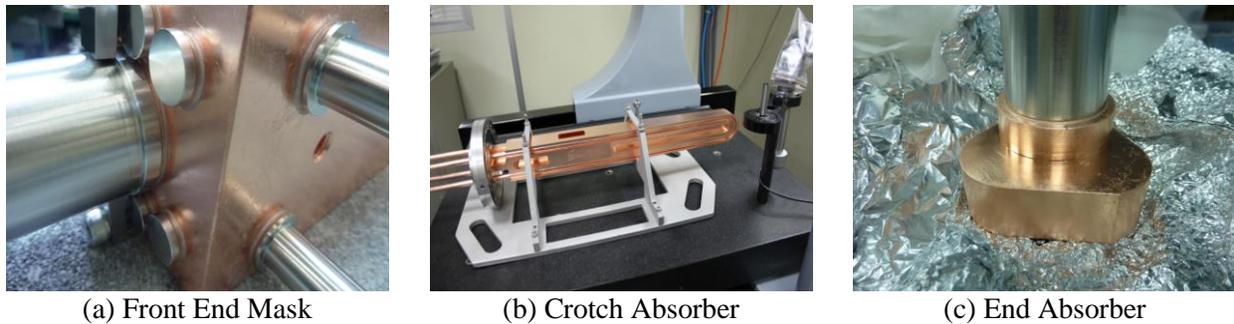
Vacuum brazed Glidcop components at the TPS storage ring, (a) front end mask with brazed aperture tube and water fittings, (b) crotch absorber in an inspection fixture, (c) end absorber used at the end of a straight vacuum chamber.
